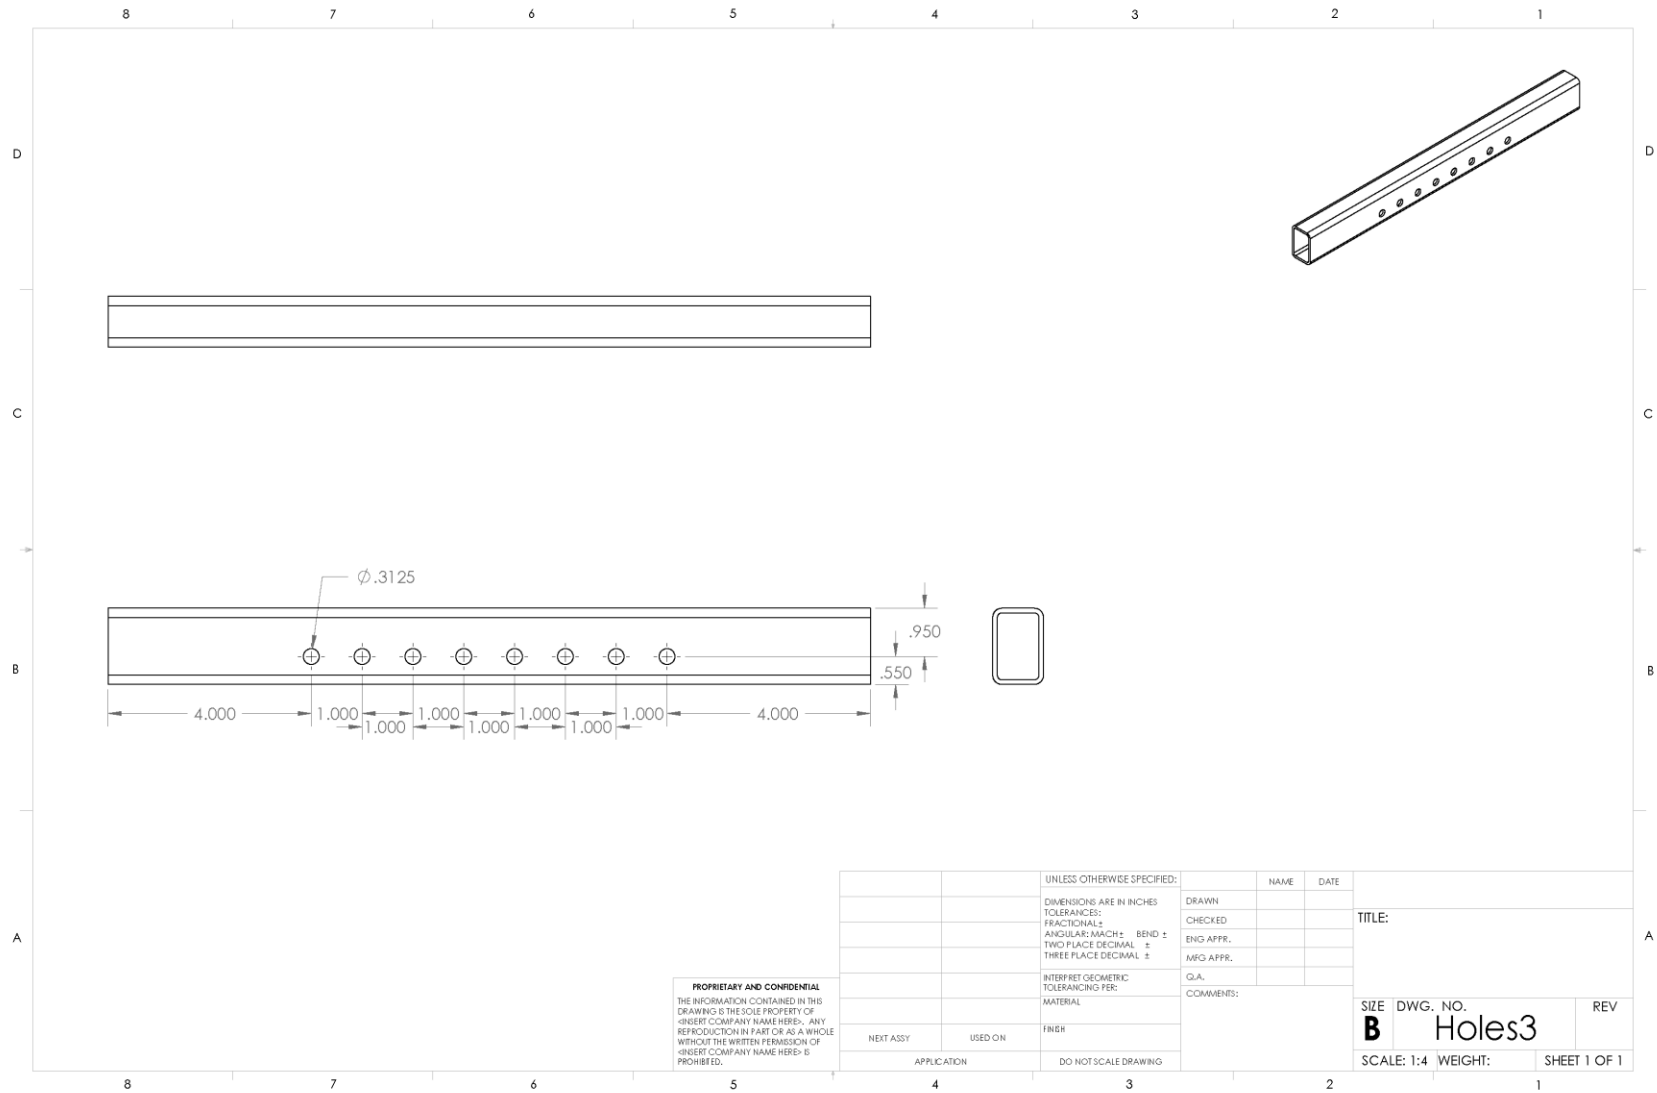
Drawing of Part 1203 with Holes for Pulley Mounting
